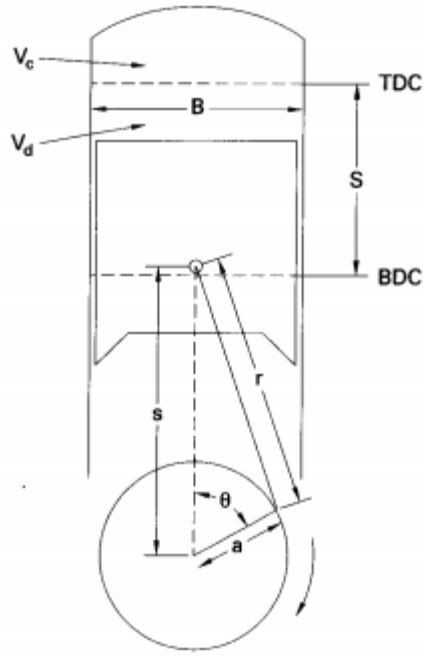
2. Crank-slider mechanism of reciprocating engine (Ferguson, 2001)
